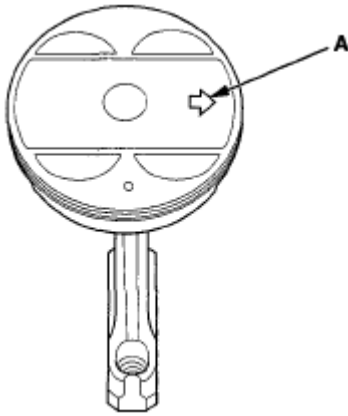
Positioning Piston/Connecting Rod Assembly With Arrow Facing Timing Belt Side Of Engine Block
